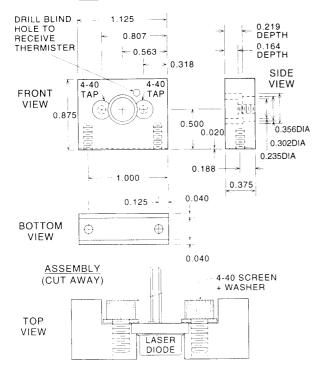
Laser mounting block, machine drawing. Dimensions are in inches. The hole sizes, spacings, and depths are correct for a Sharp LT025MDO laser and may be modified for other types.
